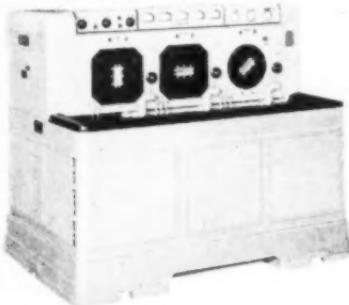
Completed TOCCO Induction Heating Machine with former base.
